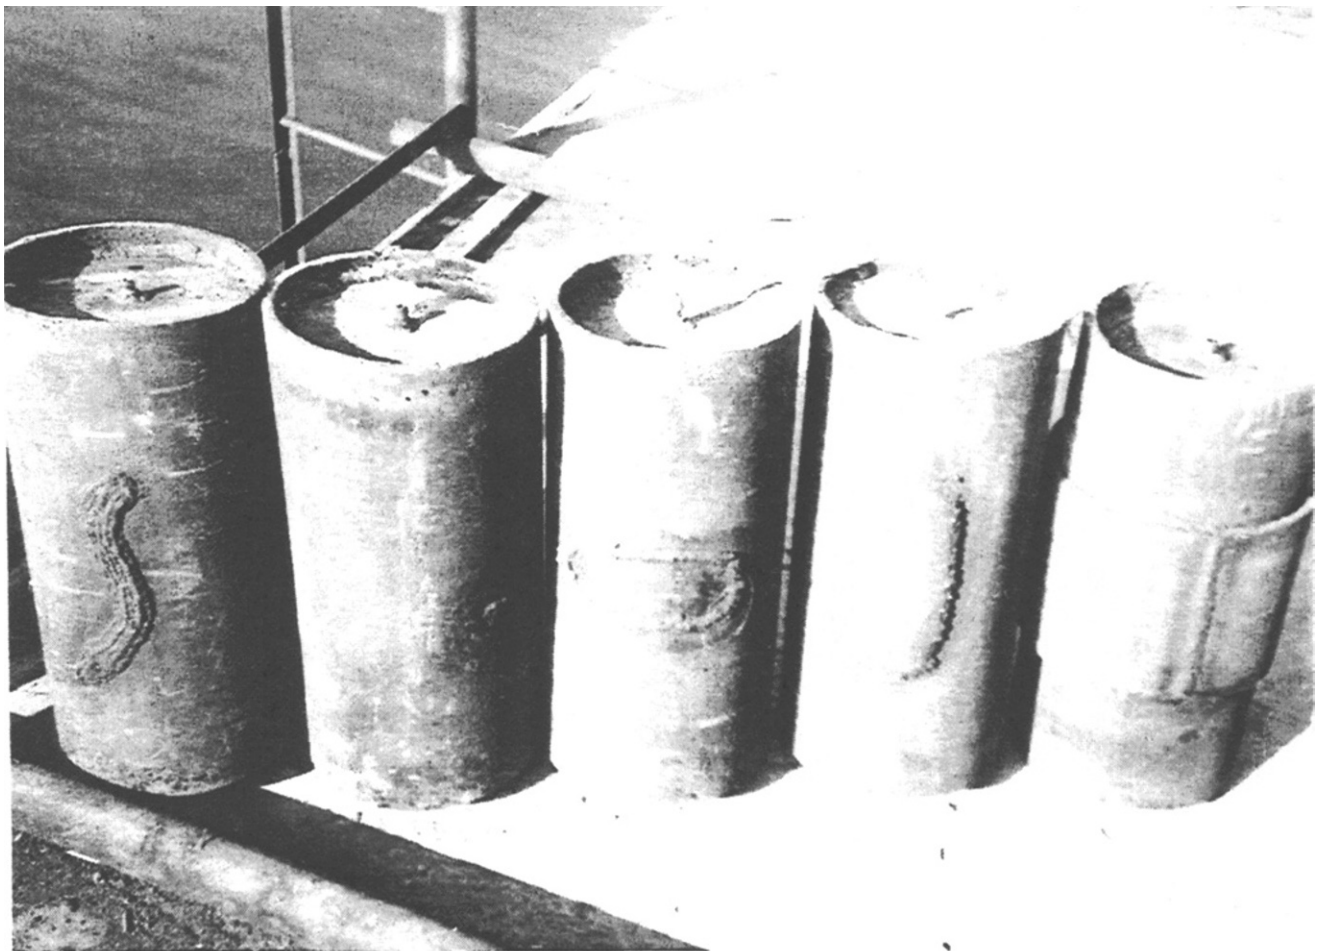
The samples simulating repair of the typical defects of pipelines after testing under inner pressure of 5 MPa
